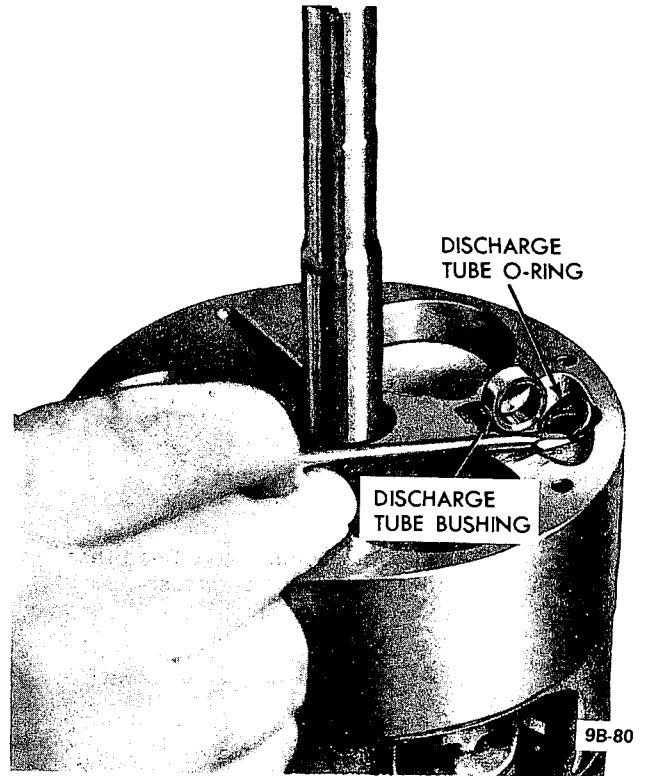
B-106 Installing Discharge Tube O Ring and Bushing - 6 Cylinder Compressor
